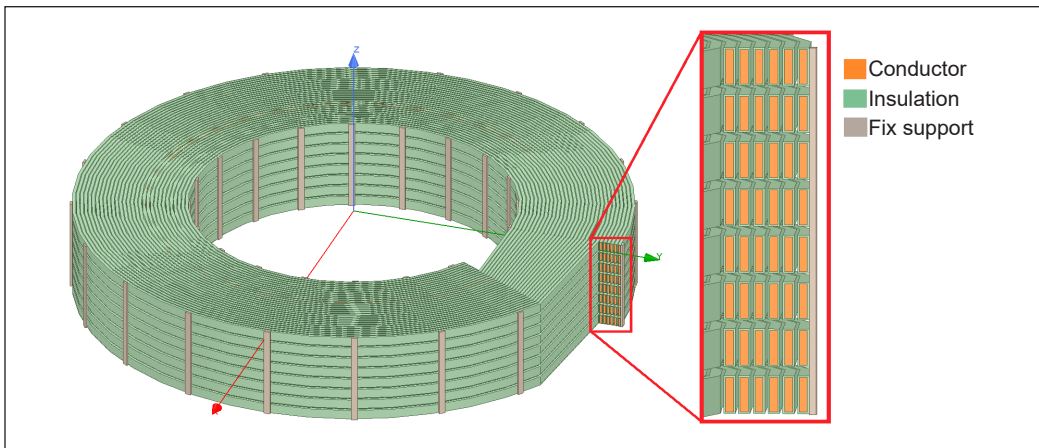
Single-phase 33/11 kV transformer front cross-section view
